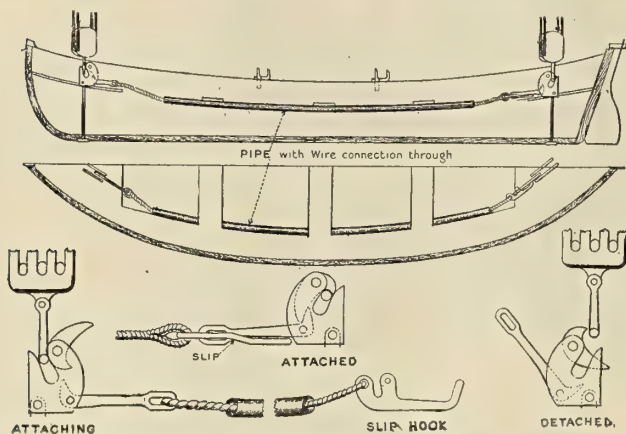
DETAILS OF LINKLETER DISENGAGING APPARATUS.
